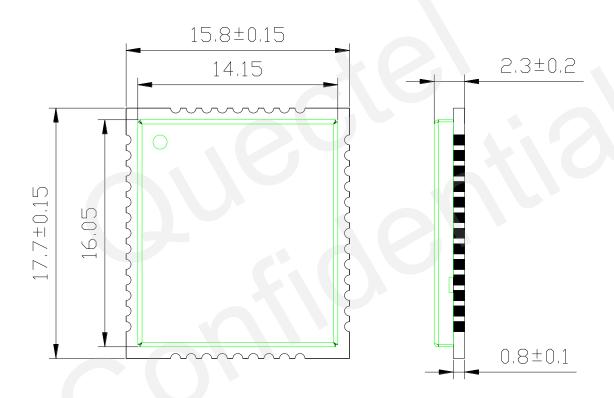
M66 Module Top and Side Dimensions (Unit: mm)
